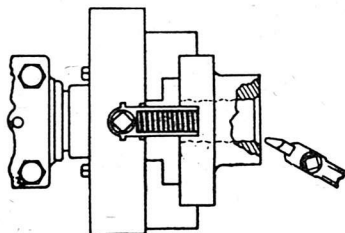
Machining a Bevel in Cored Hole to Start Drill True
